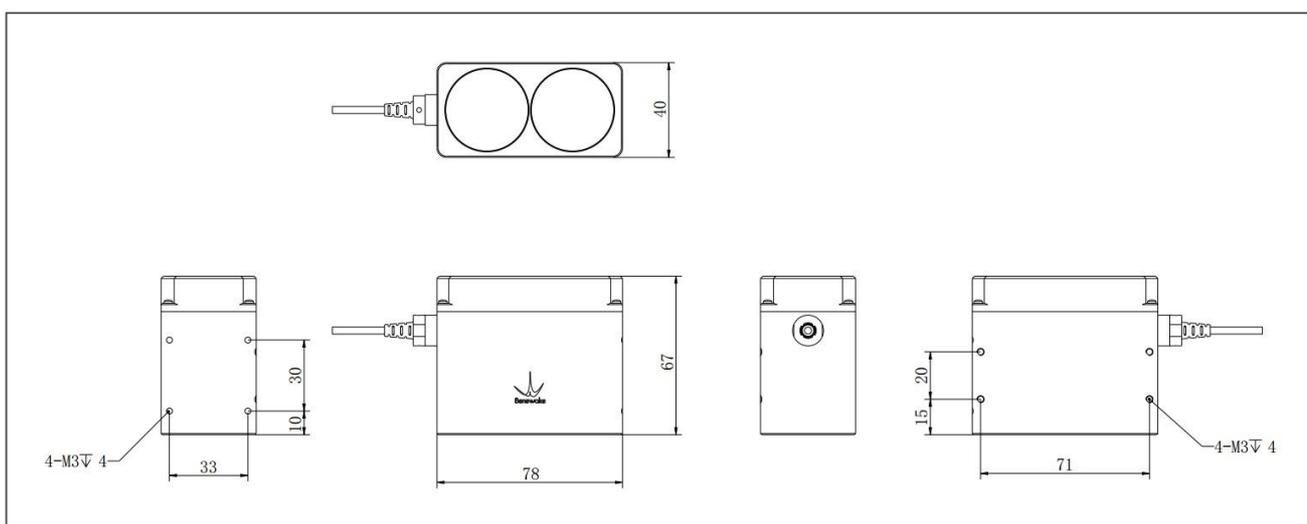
TF350 dimensions (Left 1: top view; Left 2: upward view; Left 3: front view) Unit: mm
